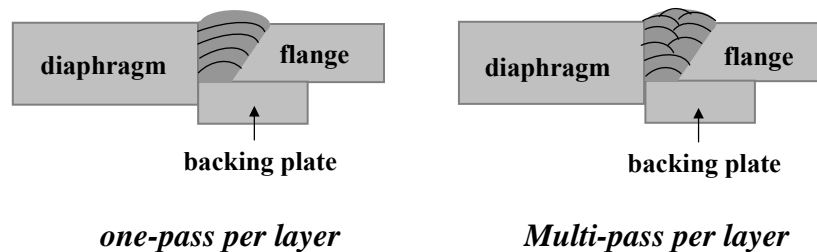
Welding pass sequence (Toyoda, 1998)
